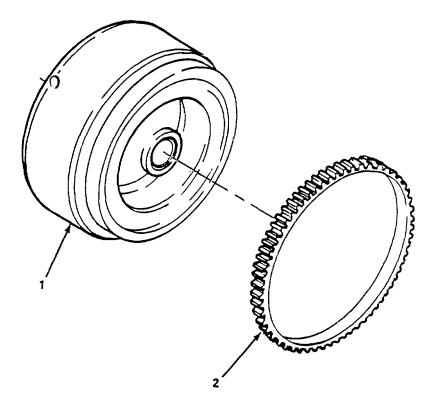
Flywheel and Clutch Carrier, Repair.
